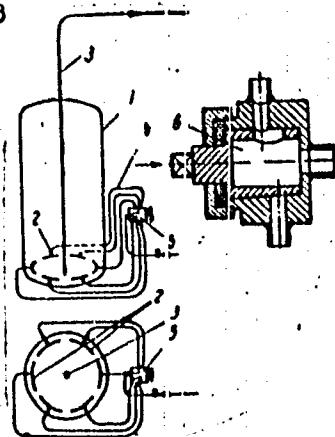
1 - cylindrical chamber; 2 - sectors of porous duct; 3 - inlet end of material duct; 4 - inlet tube; 5 - common compressed air distributor; 6 - plug.
